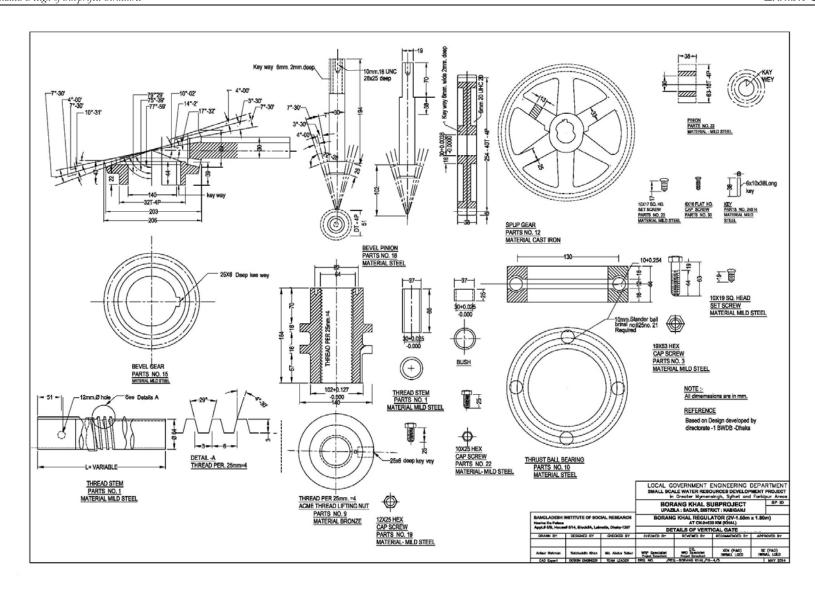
H4: Standard Drawings of Vertical Gate DETAIL DESIGN DRAWINGS VERTICAL GATE (2V-1.50m x 1.80m)
